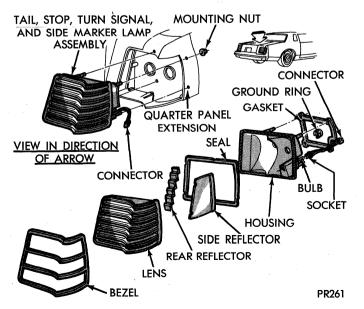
Tail, Stop, Turn Signal, and Side Marker Lamp—Carline X (Magnum XE)
